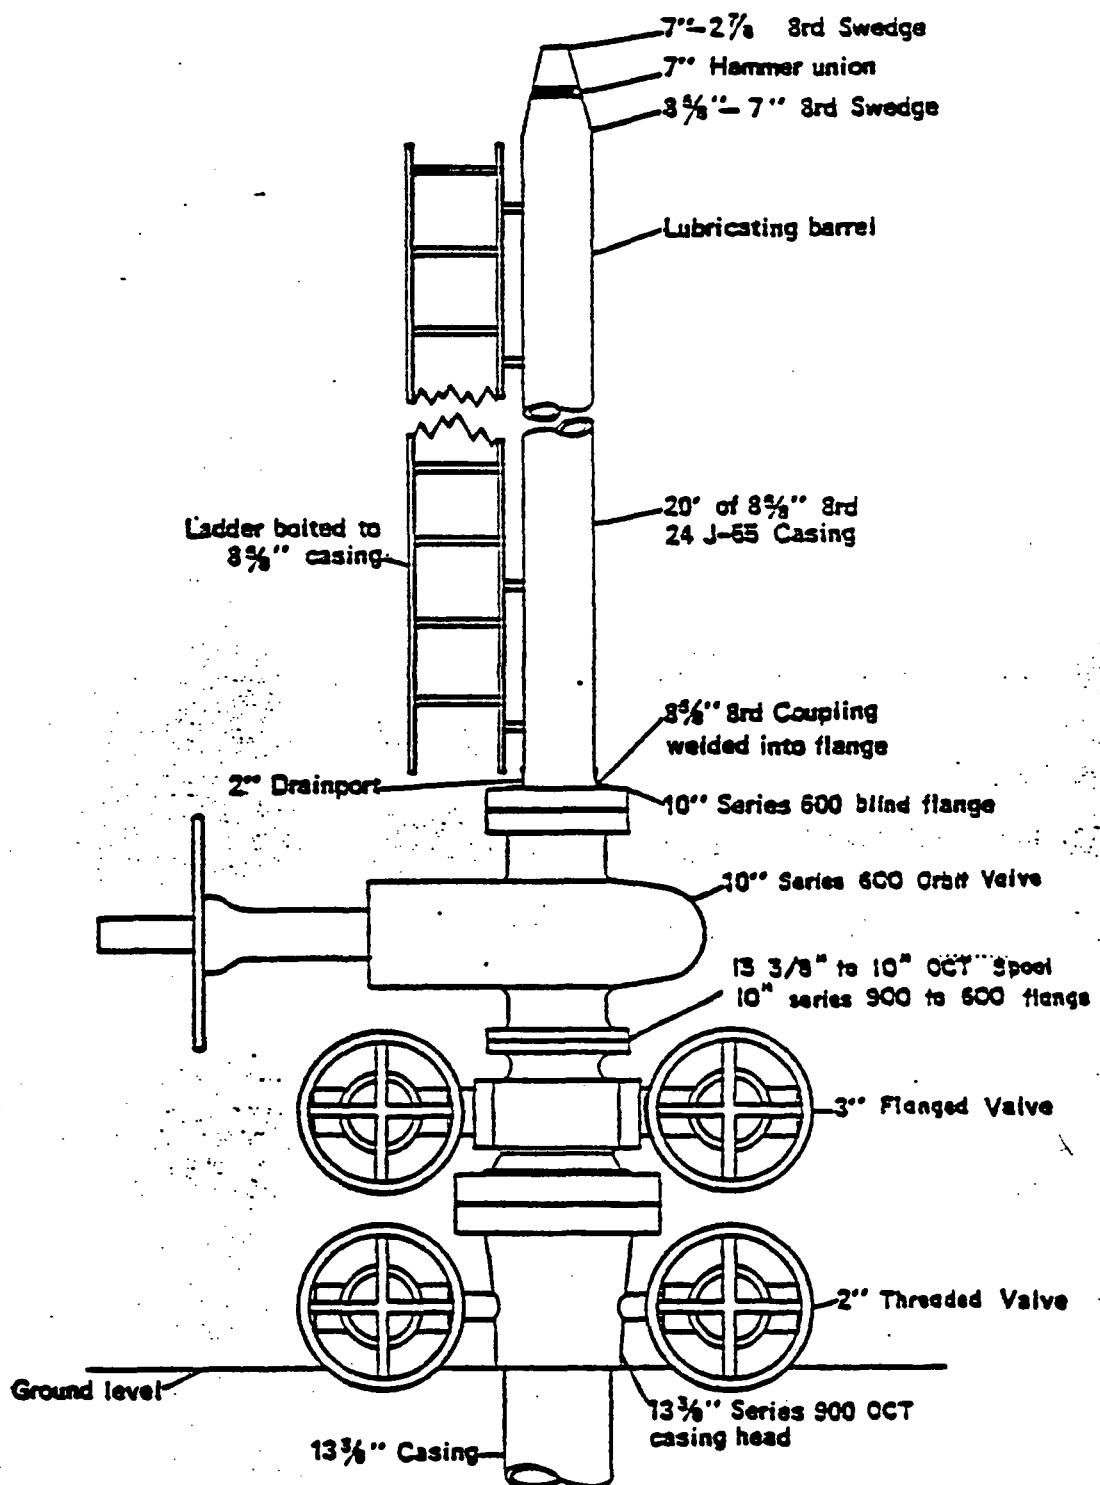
Well-head equipment of Madison test well 2, with lubricating barrel attached.
